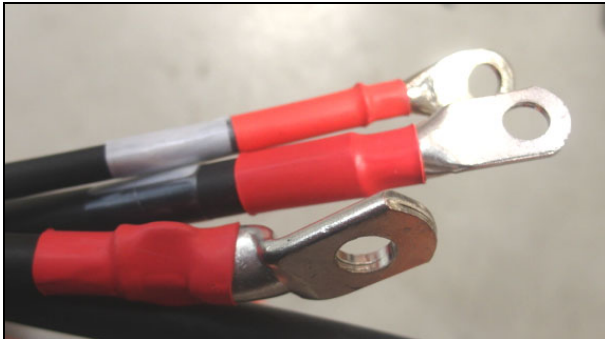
Cable lugs must be closed type, crimped or welded.
